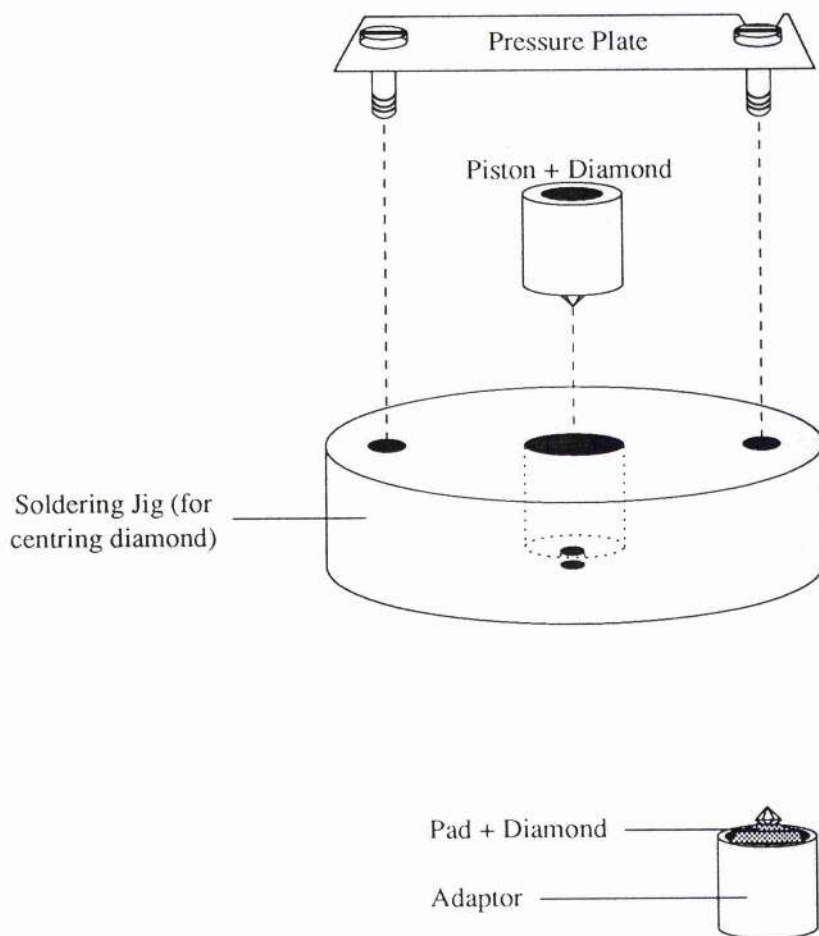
The mounting jig and adaptor for soldering diamonds into the DAC.
